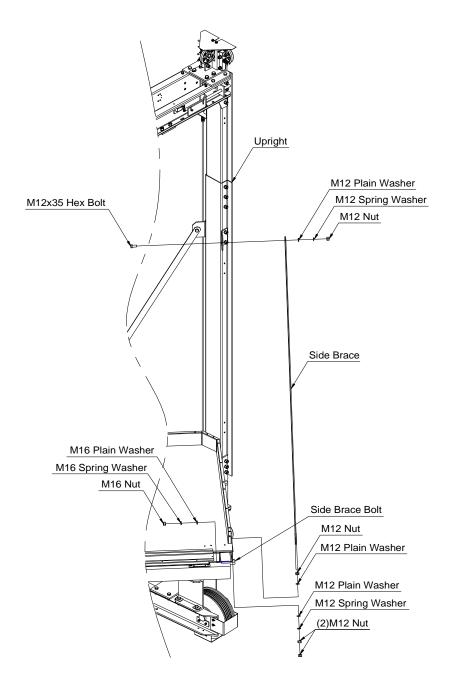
SIDE BRACE INSTALLATION (Underslung Corner post type)
